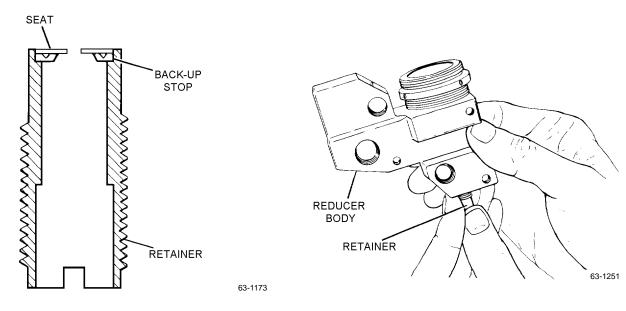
Emergency Oxygen Pressure Reducer Tool Set
